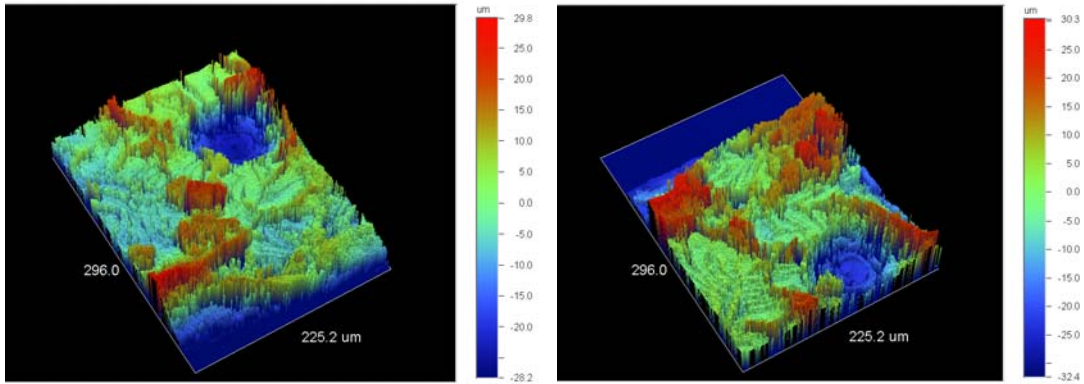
3-D profiles of the butt-brazed joint matching fracture surfaces
